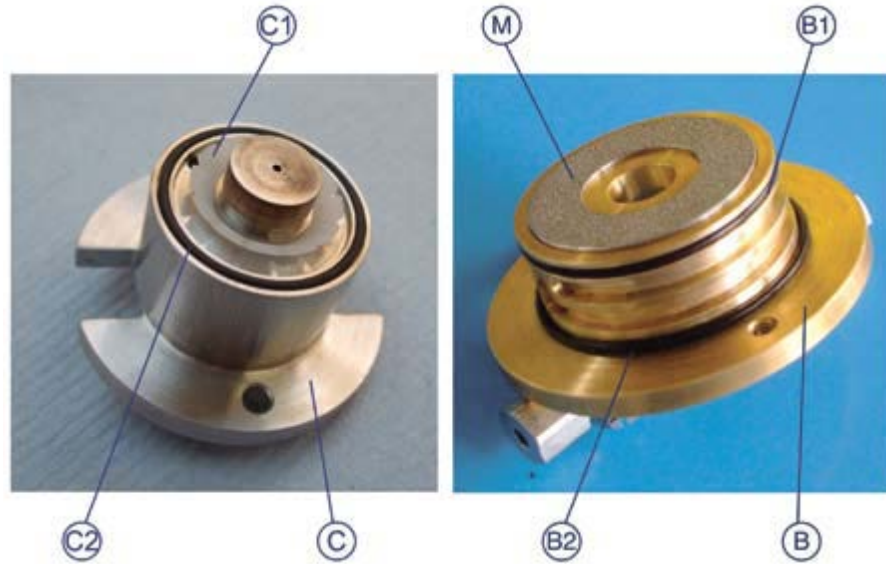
Center body of the nozzle (C) with PTFE crown C1 for homogenization of the supporting flame flow and o-ring C2 (left). The sheath gas body (B) with the sheath gas homogenizer M and o-rings B1 and B2 is depicted on the right
